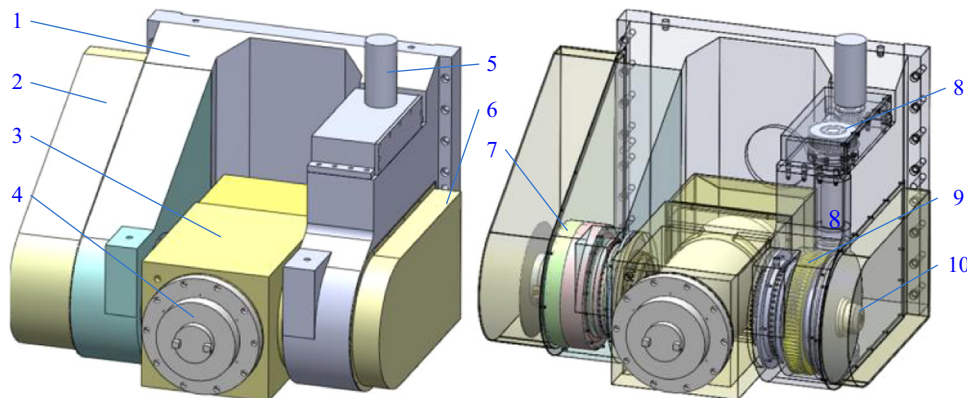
Mechanical structure of the A-axis. 1- Support; 2- Left shield; 3- Spindle box; 4- Motorized spindle; 5- Servomotor; 6- Right shield; 7- Locking mechanism; 8- Pulleys; 9- Wormgear; 10- Encoder.
